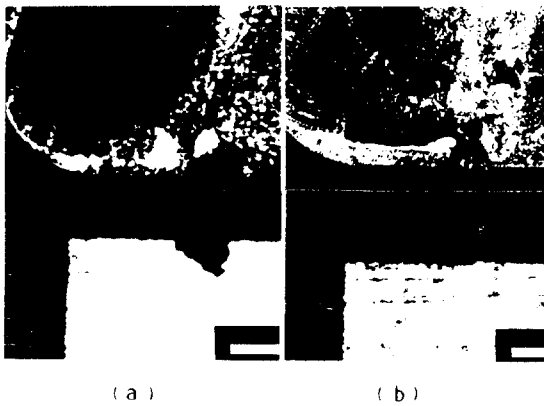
Photograph of the tool wear (cutting speed 5.5m/s, feed 0.124mm/rev, cutting length 50mm, depth of cut 1.5mm)
